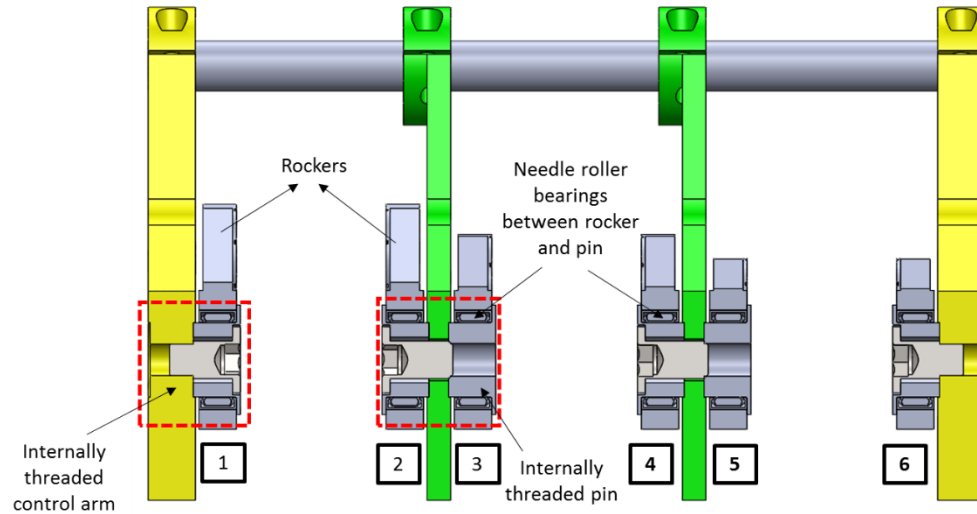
Method of connecting linkage and adjustment mechanism assemblies
